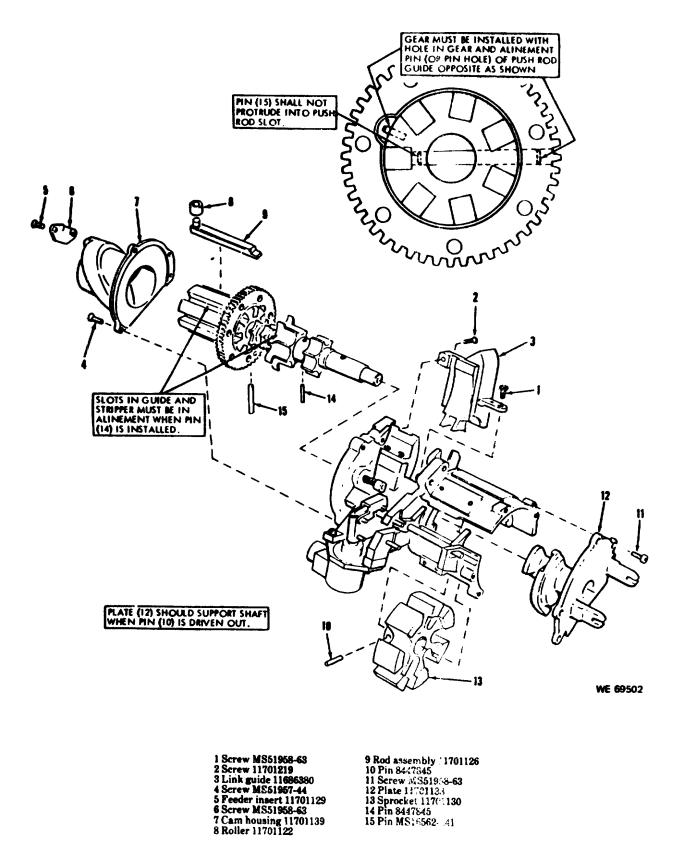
Delinking feeder MAU-56/A – partially exploded view.
